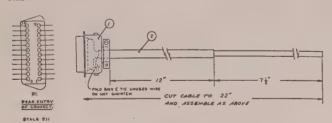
OPTION 35 CABLE ASSEMBLY 25 CONDUCTOR #057778 Rev A₁
